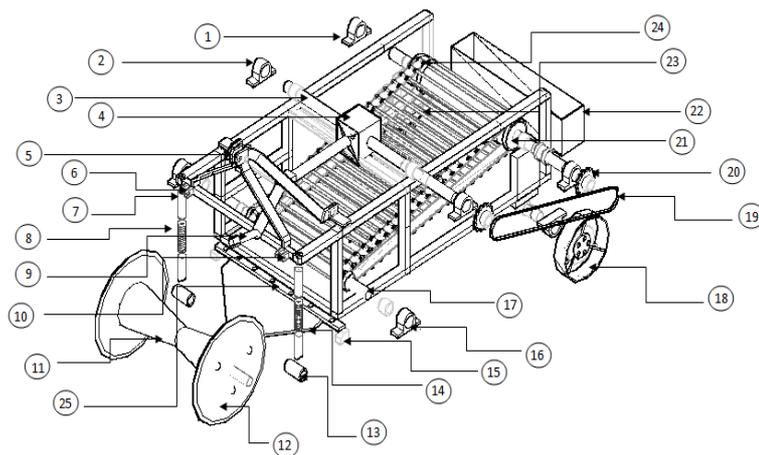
Exploded assembly drawing of component parts of the cocoyam harvester
